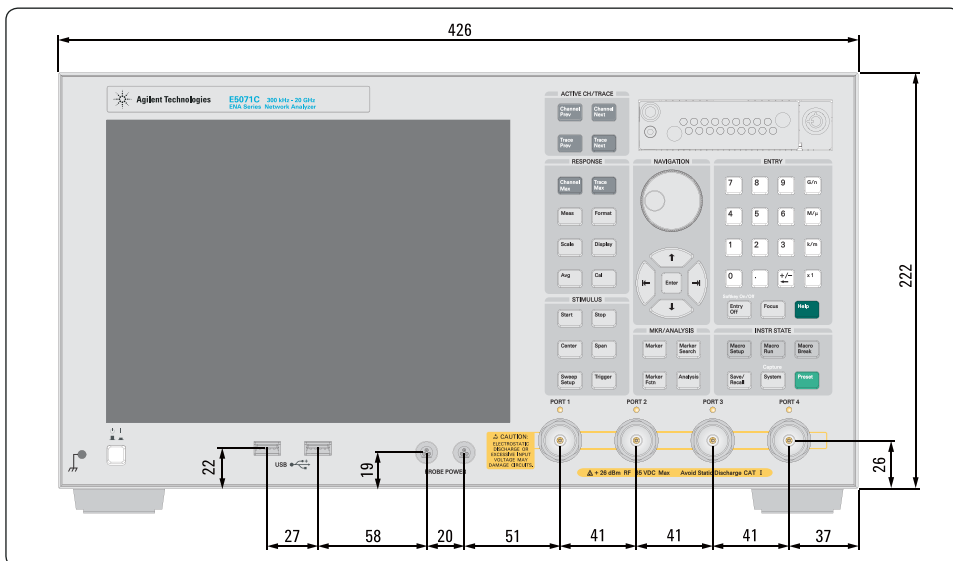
Dimensions (front view, E5071C with Option 4D5/4K5, in millimeters)
